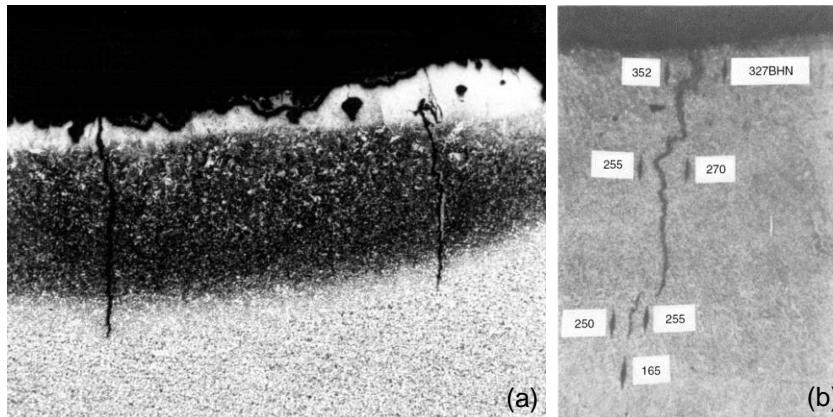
SSC in (a) hard weld in ASTM A516-70 plate steel [9] and (b) hard heat-affected zone next to weld in A516-70 pressure vessel steel [10]
